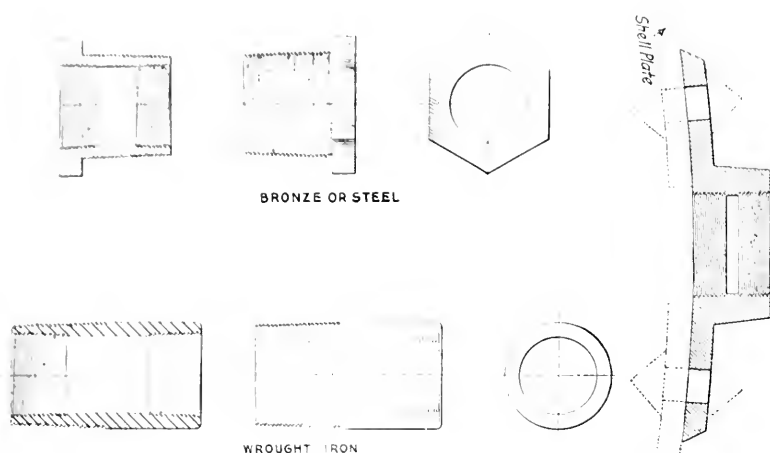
A TYPES OF BOILER FLANGES AND BUSHINGS
